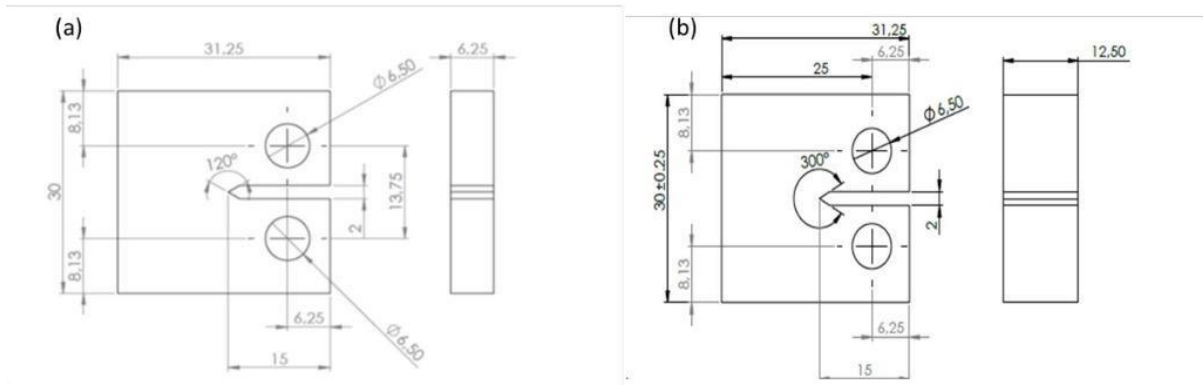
Drawings of the (a) FCGR and (b) fracture toughness compact test specimens machined at the UCT workshop
